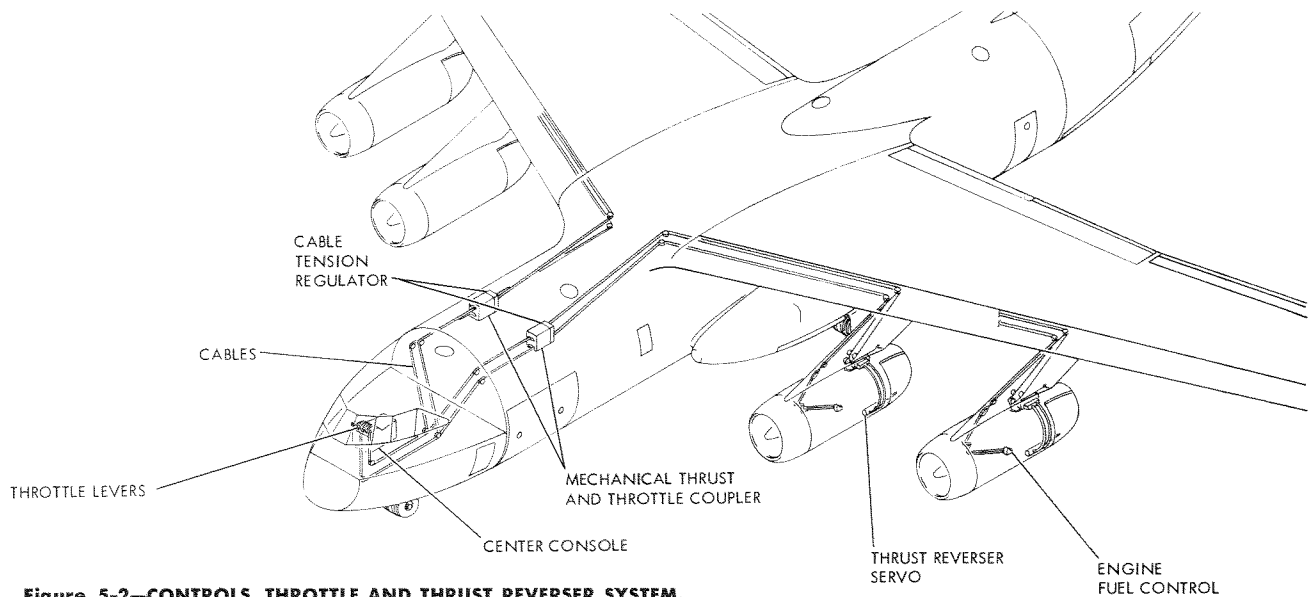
CONTROLS, THROTTLE AND THRUST REVERSER SYSTEM.
